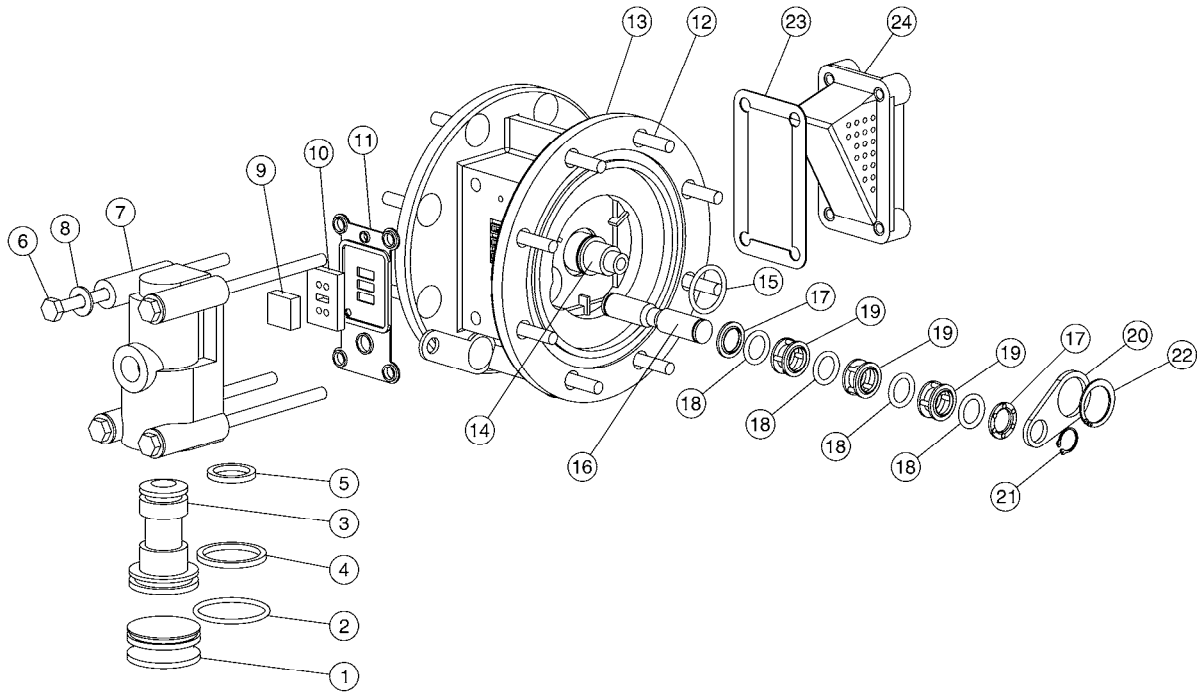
Exploded view of the valve section of the Pneumatic Diaphragm Pump.
